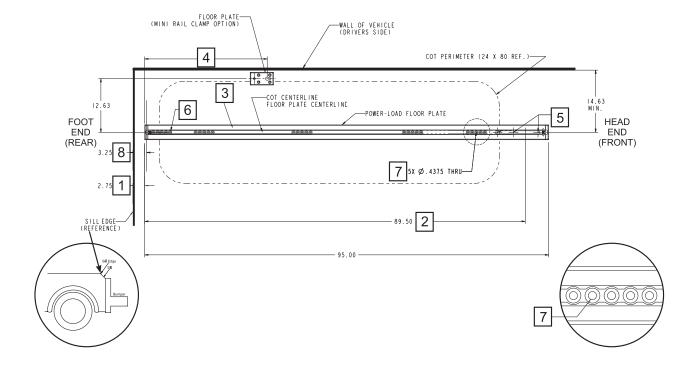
Power-LOAD Floor Plate with Single Standard Floor Mount Cot Fastener Floor Plate (Optional)
